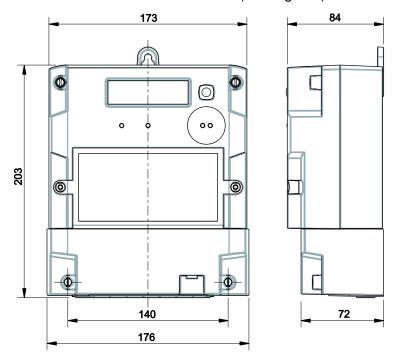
Meter dimensions (version with standard terminal cover)
